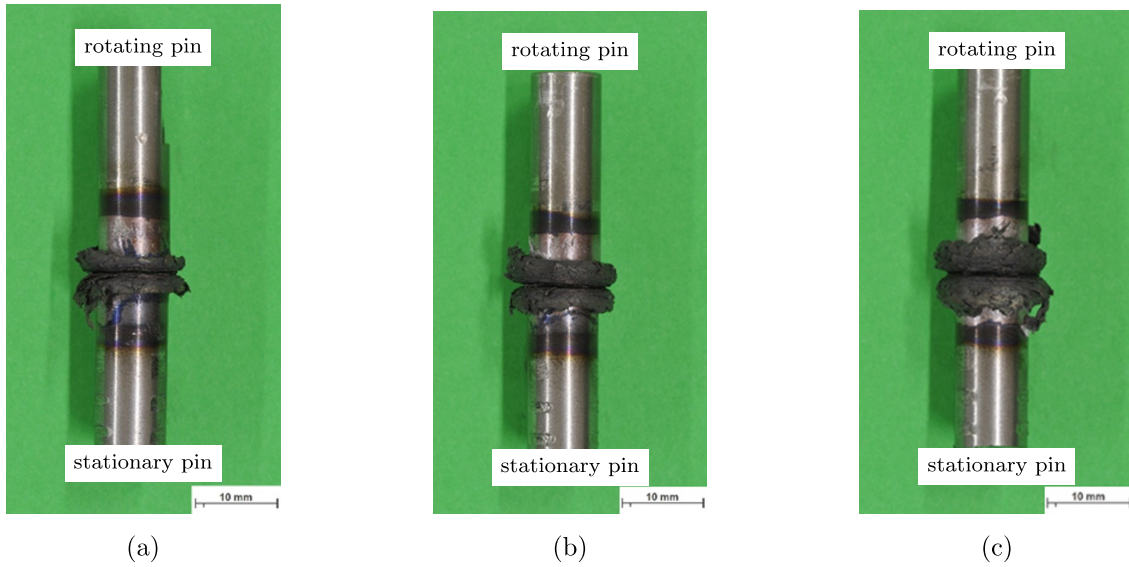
As-welded RFW TZM specimens (a) 2500 rpm (b) 2600 rpm (c) 2750 rpm
